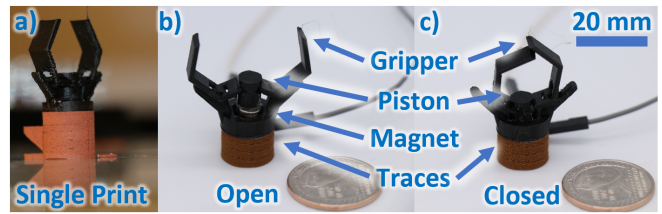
A fully 3D printed actuator and gripper can be co-fabricated within a single 3D print. This demonstration shows how coils can be fully integrated in the multi-material additively manufactured components. The gripper is shown a) post printing and in b) open and c) closed states.
